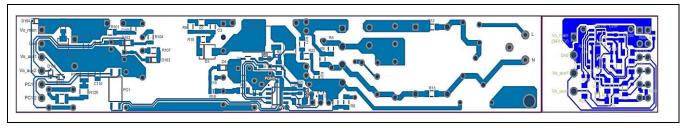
PCB bottom layout of main board and 54 V CV SSR plug-in board
